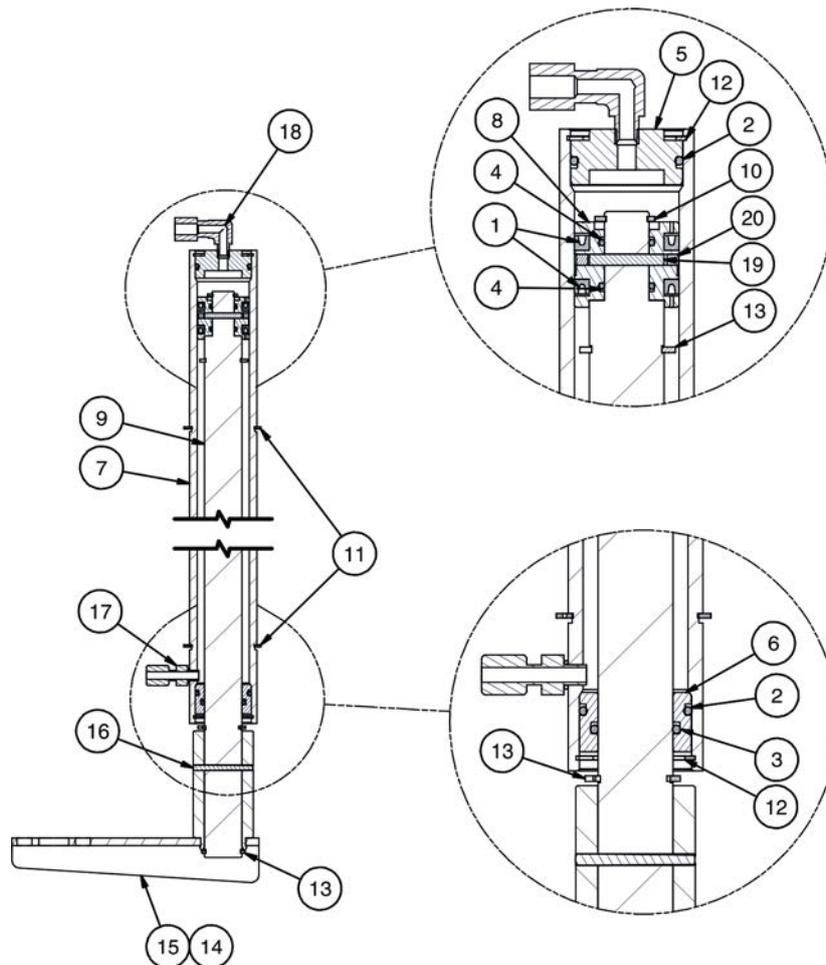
A . CONTHERM™ Hydraulic Lift Assembly
